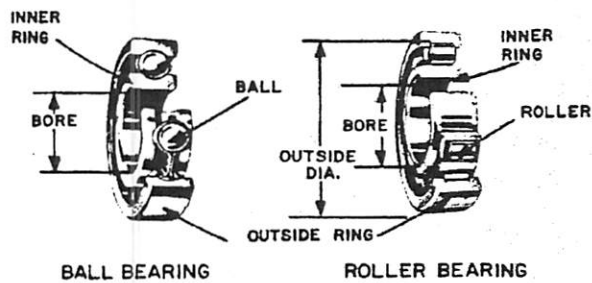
Cutaway view of common types of antifriction bearings.
